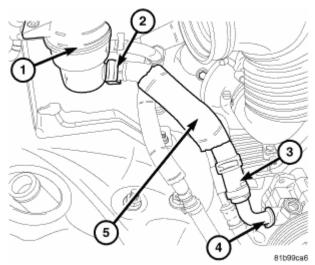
Identifying Return Hose Assembly & Routing Clip Courtesy of CHRYSLER LLC
